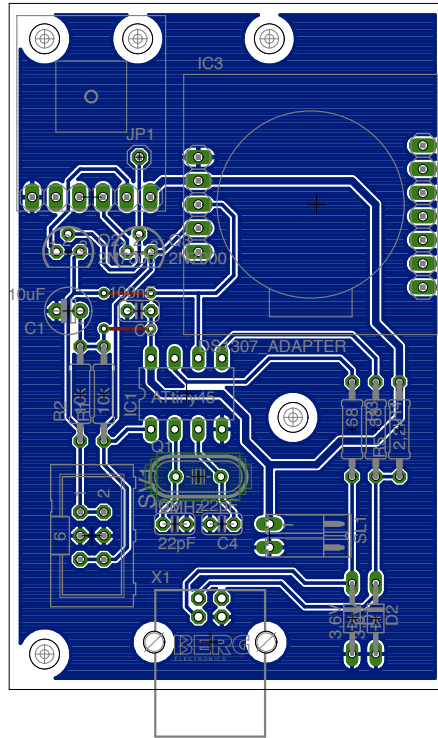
PCB layout of the USB to I²C adapter. The one-sided layout has a size of 47 mm × 74 mm and has drill holes matching the layout of other modules to allow stacking with 20 mm straight connectors.
